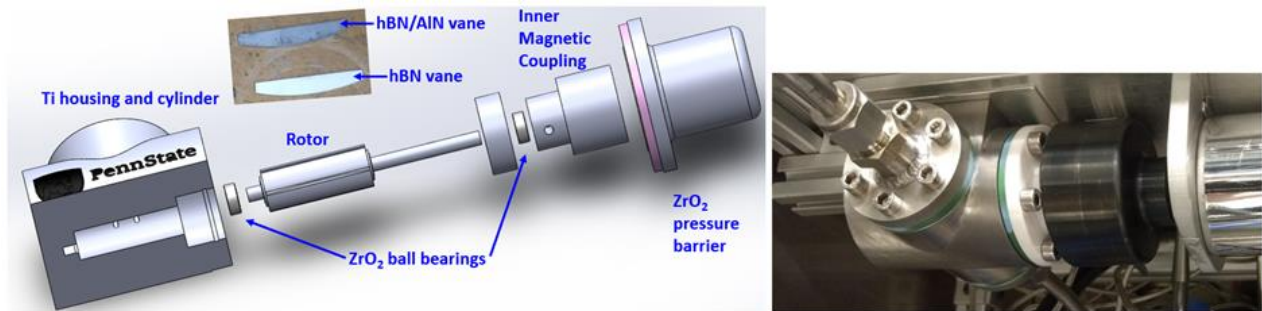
RVE version 2, SolidWorks assembly (left) and installed on test stand (right)
